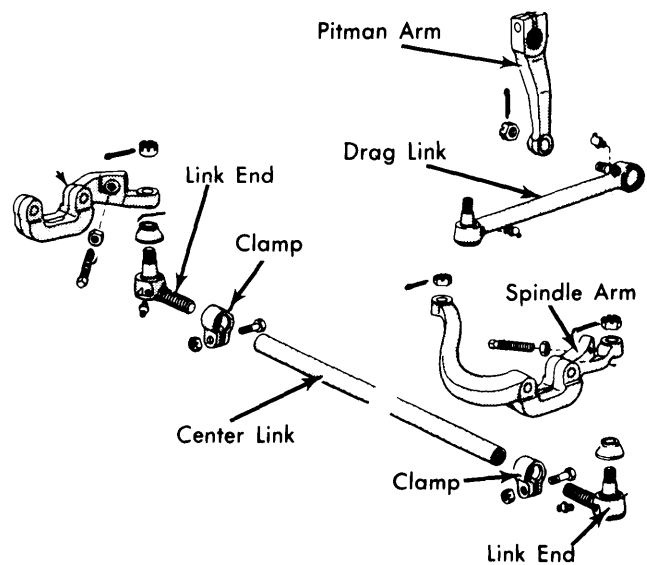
Disassembled View of "P" Models with Straight "I" Beam Axle
